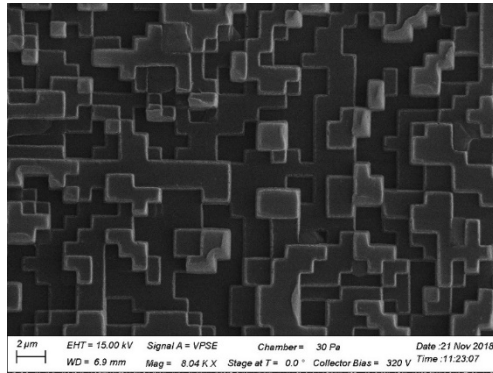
Injection molded DOE structures made by injection molding with the steel insert shown in Figure 3.
